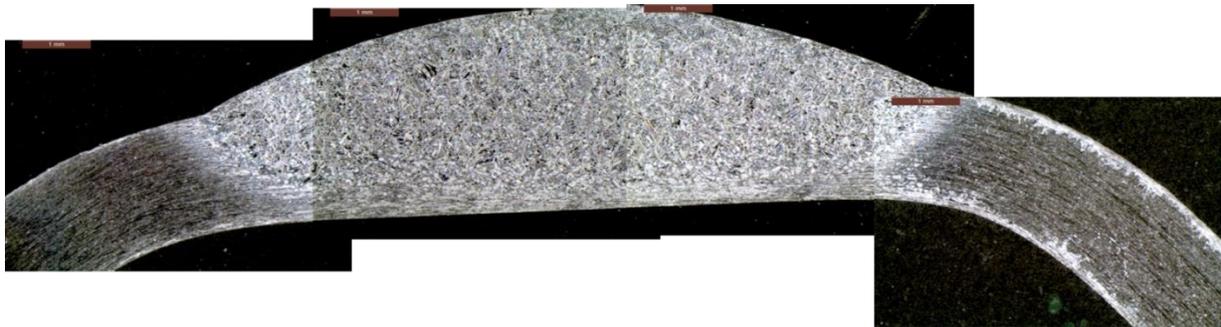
Cross section of weld on U-bend on Duplex 2205
